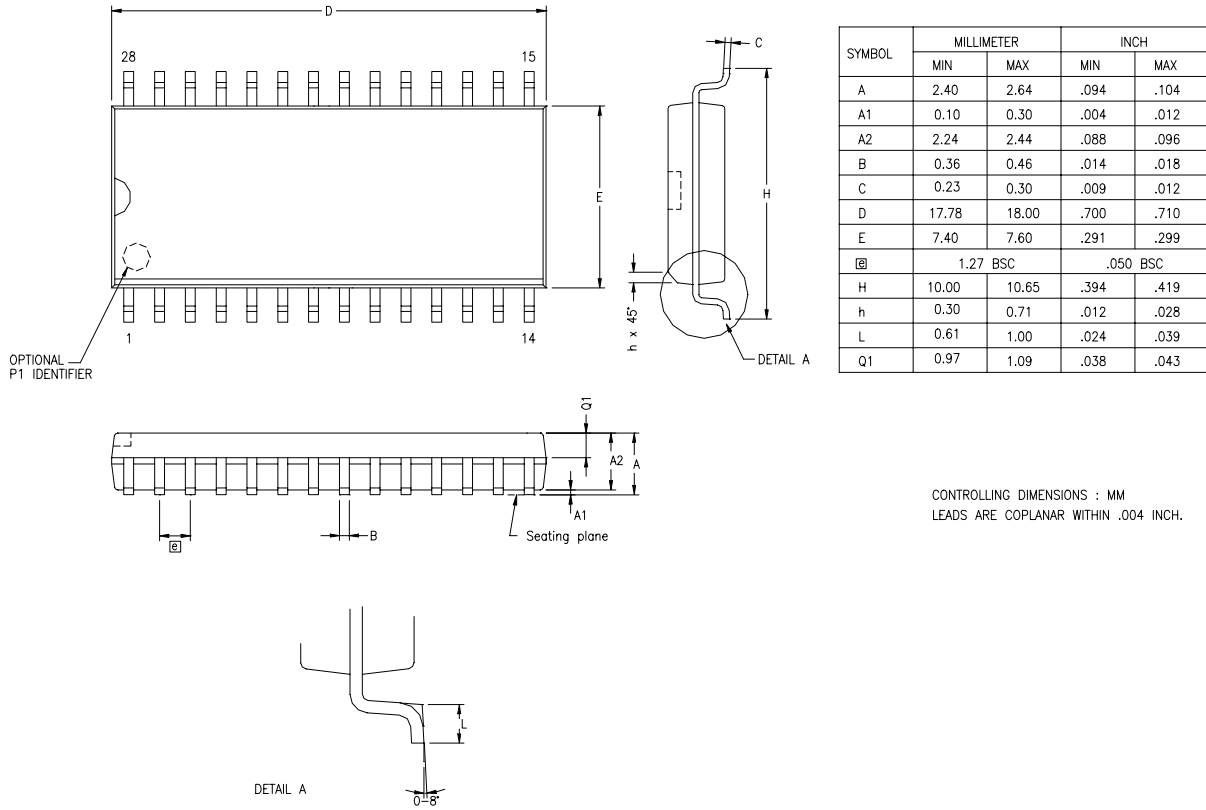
28-Pin Small Outline Integrated Circuit (SOIC) Package
